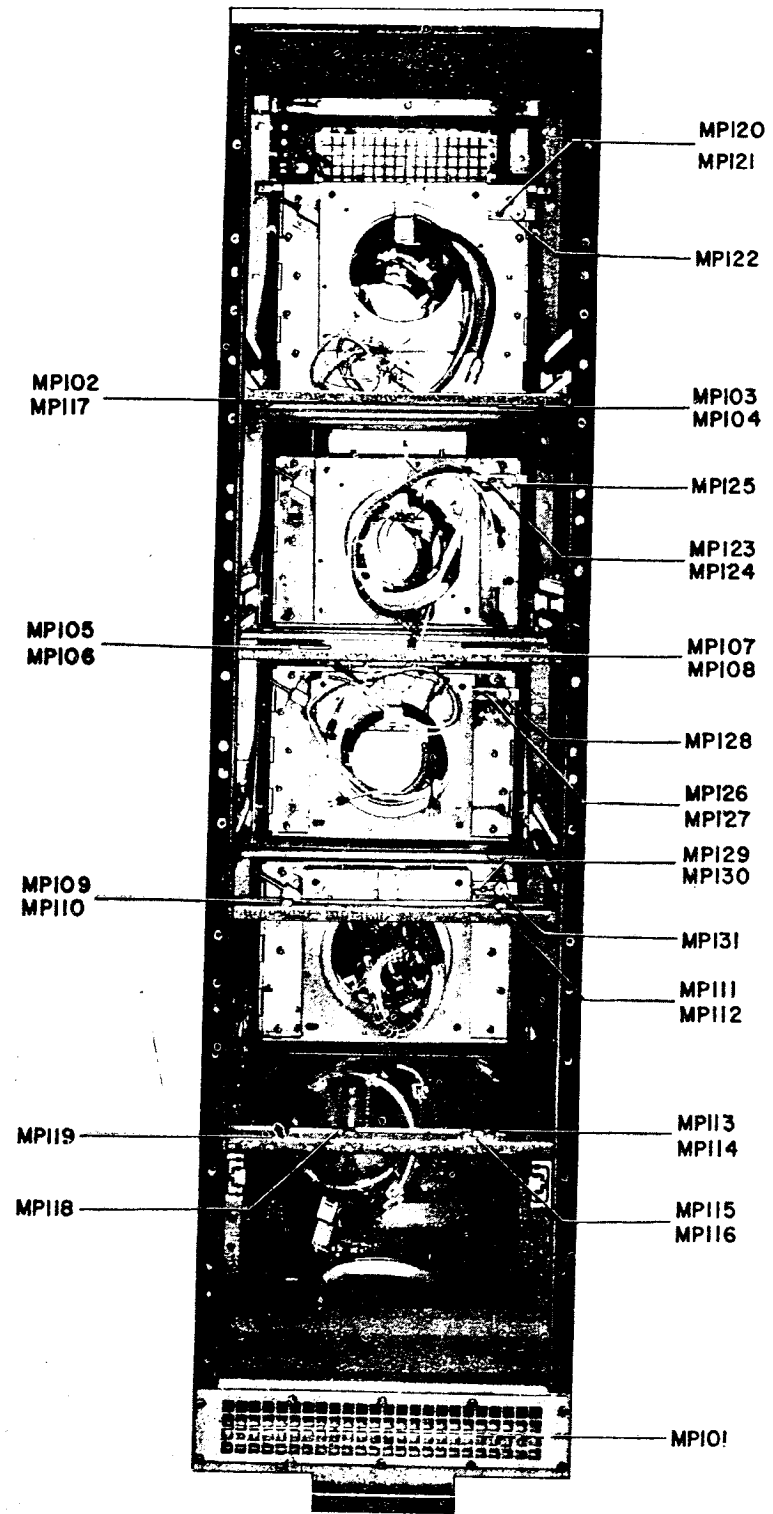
Electrical Equipment Cabinet CY-2607/WRT-1 Replaceable, Mechanical Parts
